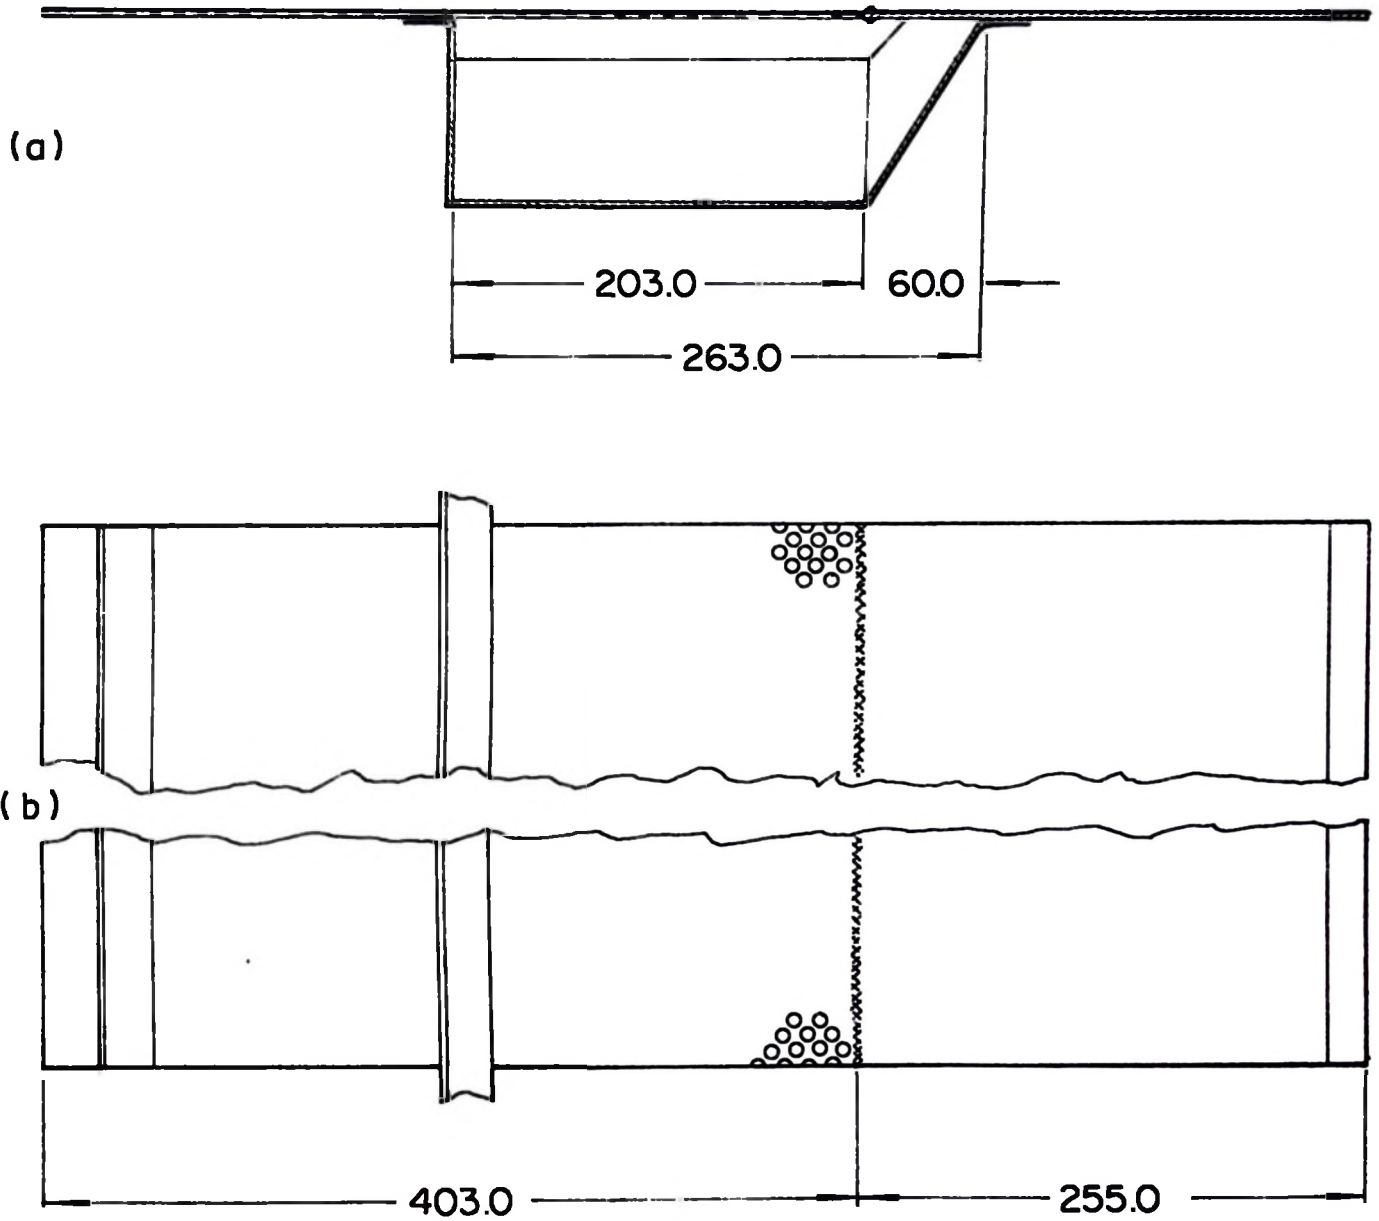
(a). The cross section assembly of the spout screen and the output spout.
